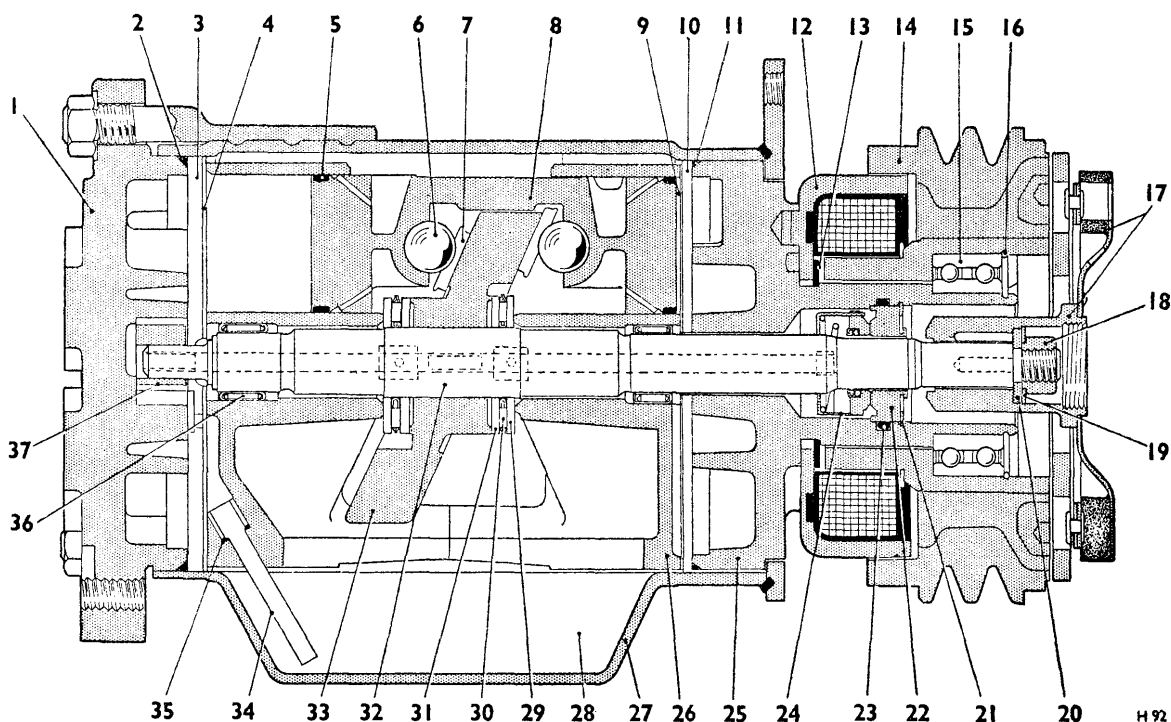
SECTION VIEW OF REFRIGERANT COMPRESSOR
